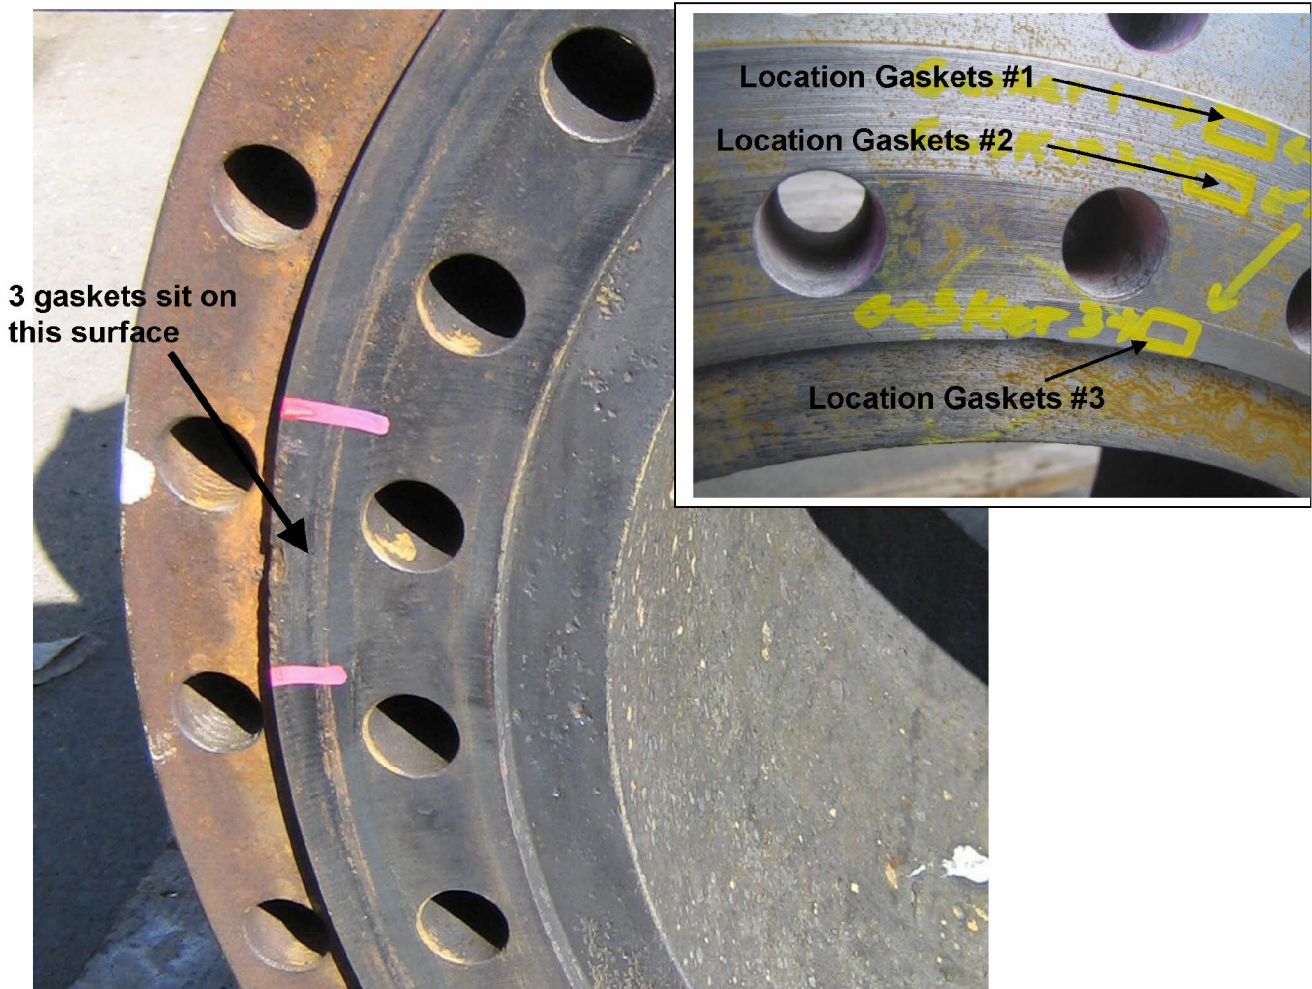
Example of gasket surface damage on E-1101B tail pipe mating spool.
